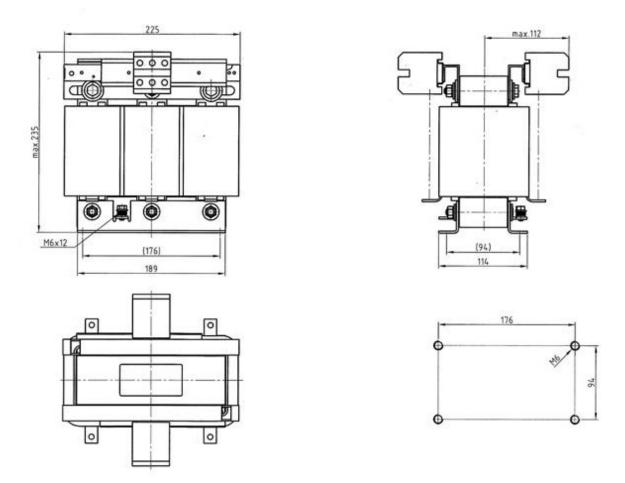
Dimension drawing of line reactor for Smart Line Module 36 kW
